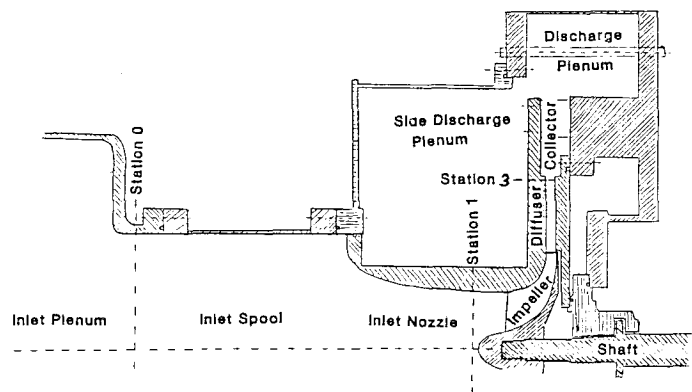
Cross section of centrifugal compressor build-up with inlet and discharge configuration and definition of location of measurement stations.
